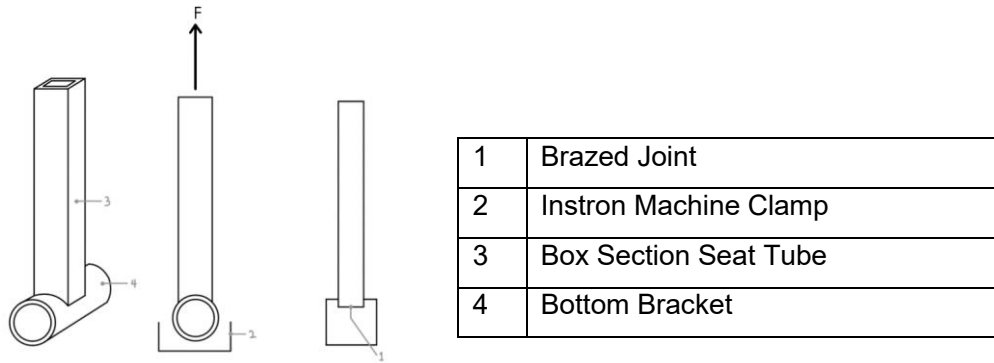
Diagram of Bottom Bracket Brazed Joint Fatigue Test
